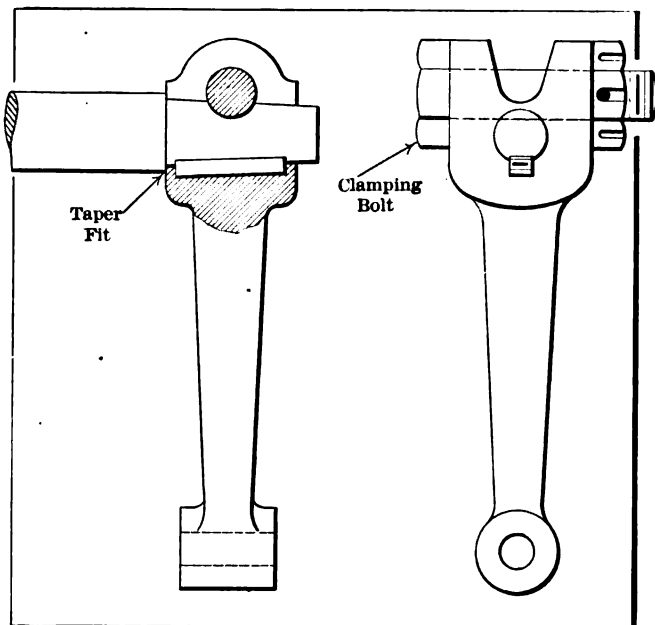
Showing a lever with a key on a tapered shaft with a clamping bolt and locking nut
